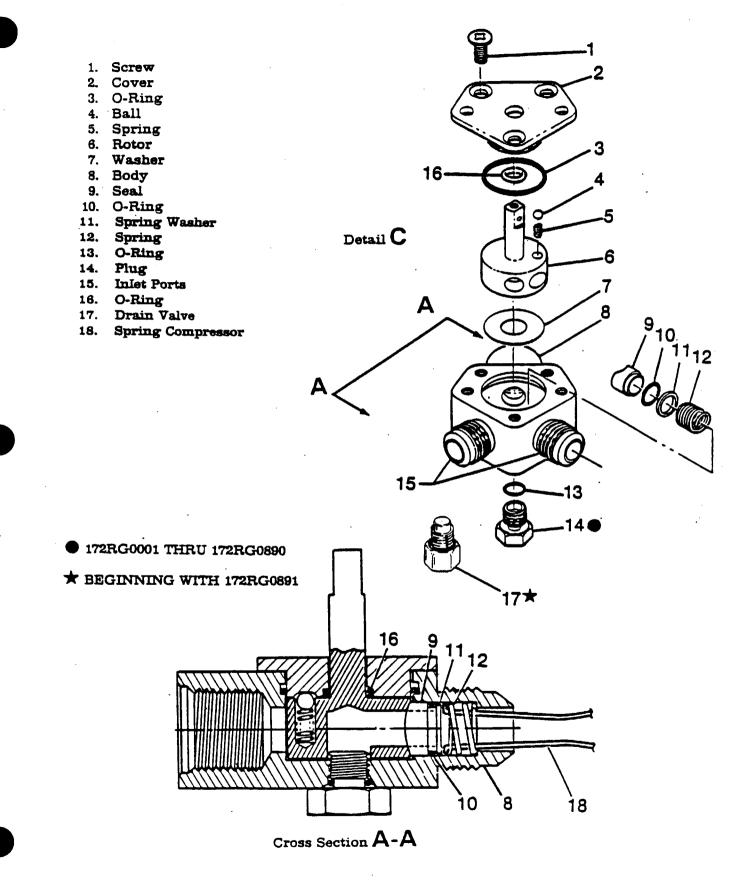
Fuel Selector Valve and Spring Compressor (Sheet 4 of 4)
